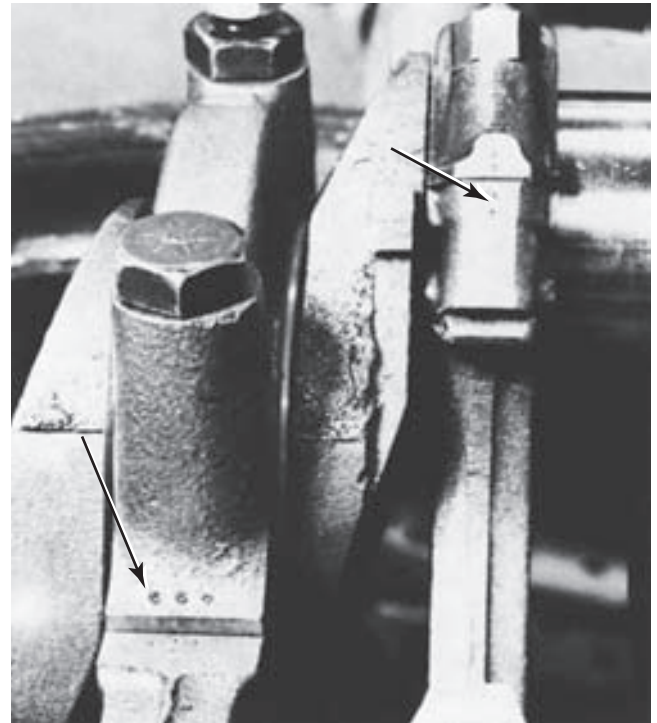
If the rods and mains are not marked, it is wise to use a punch to make identifying marks *before* disassembly of the engine.
